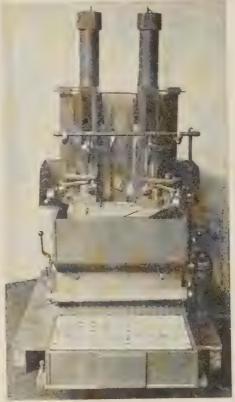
Vertical, Hydraulic, Duplex Broaching Machine With Automatic Indexing Table
